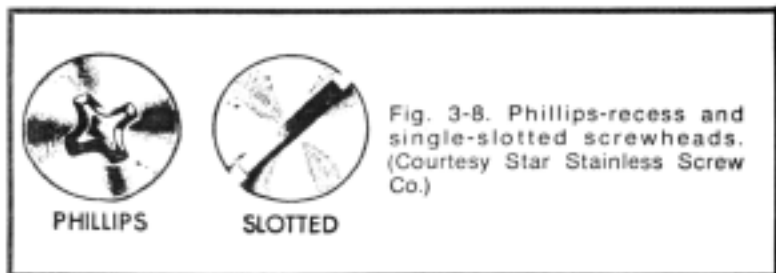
Phillips-recess and single-slotted screwheads. (Courtesy Star Stainless Screw Co.)
